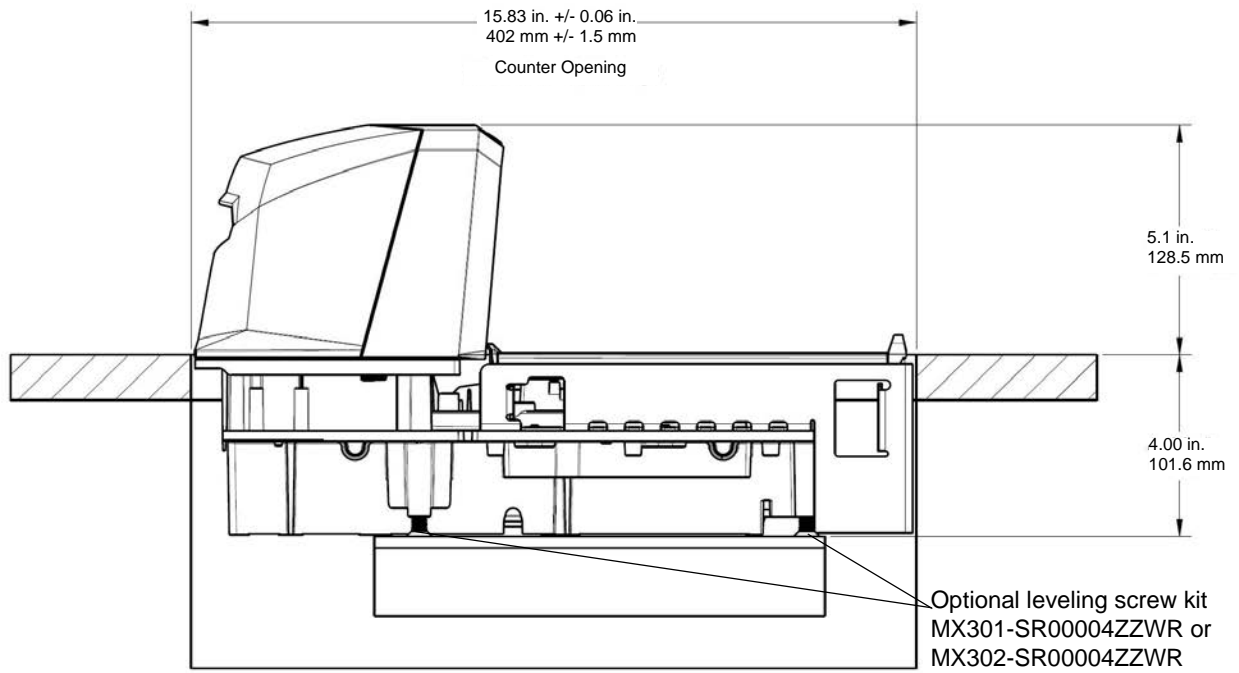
MP6000 - Medium Unit Side View Dimensions
